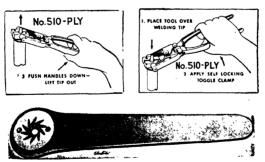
Tools for cleaning tips and removing taper tips (Courtesy of: Eisler Engineering Co., Inc.)
